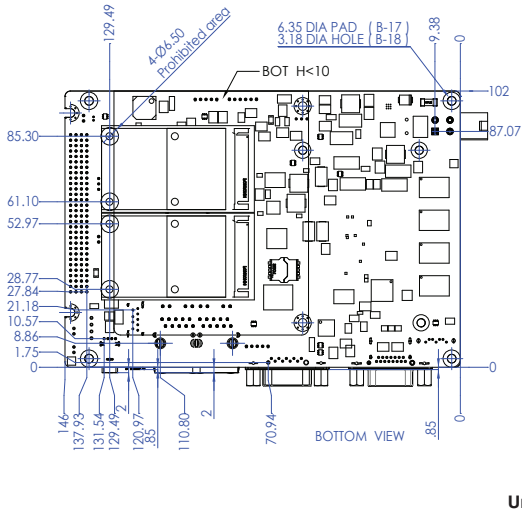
PCM-9365 Mechanical Drawing (Bottom Side)
